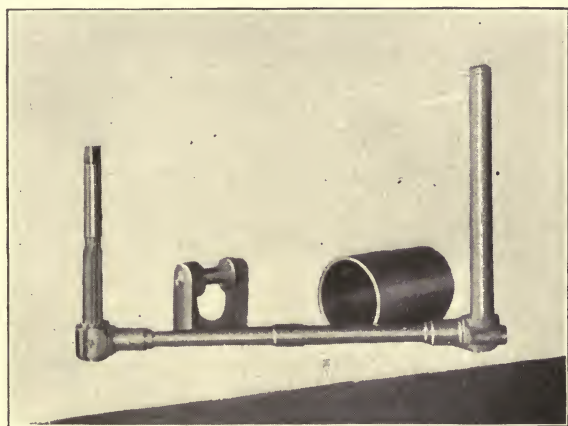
PUTTING CONNECTING ROD ENDS
